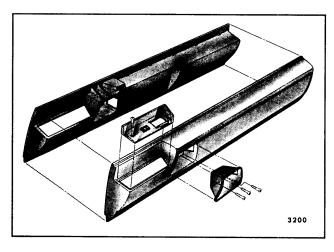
Door Arm Rest – "E" Style Shown, Cadillac "C" Styles Typical
